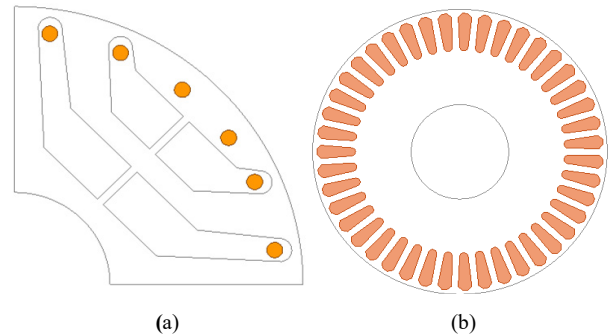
Rotors ‘cross section, (a) SynRM with brass bars, (b) squirrel cage induction motor
